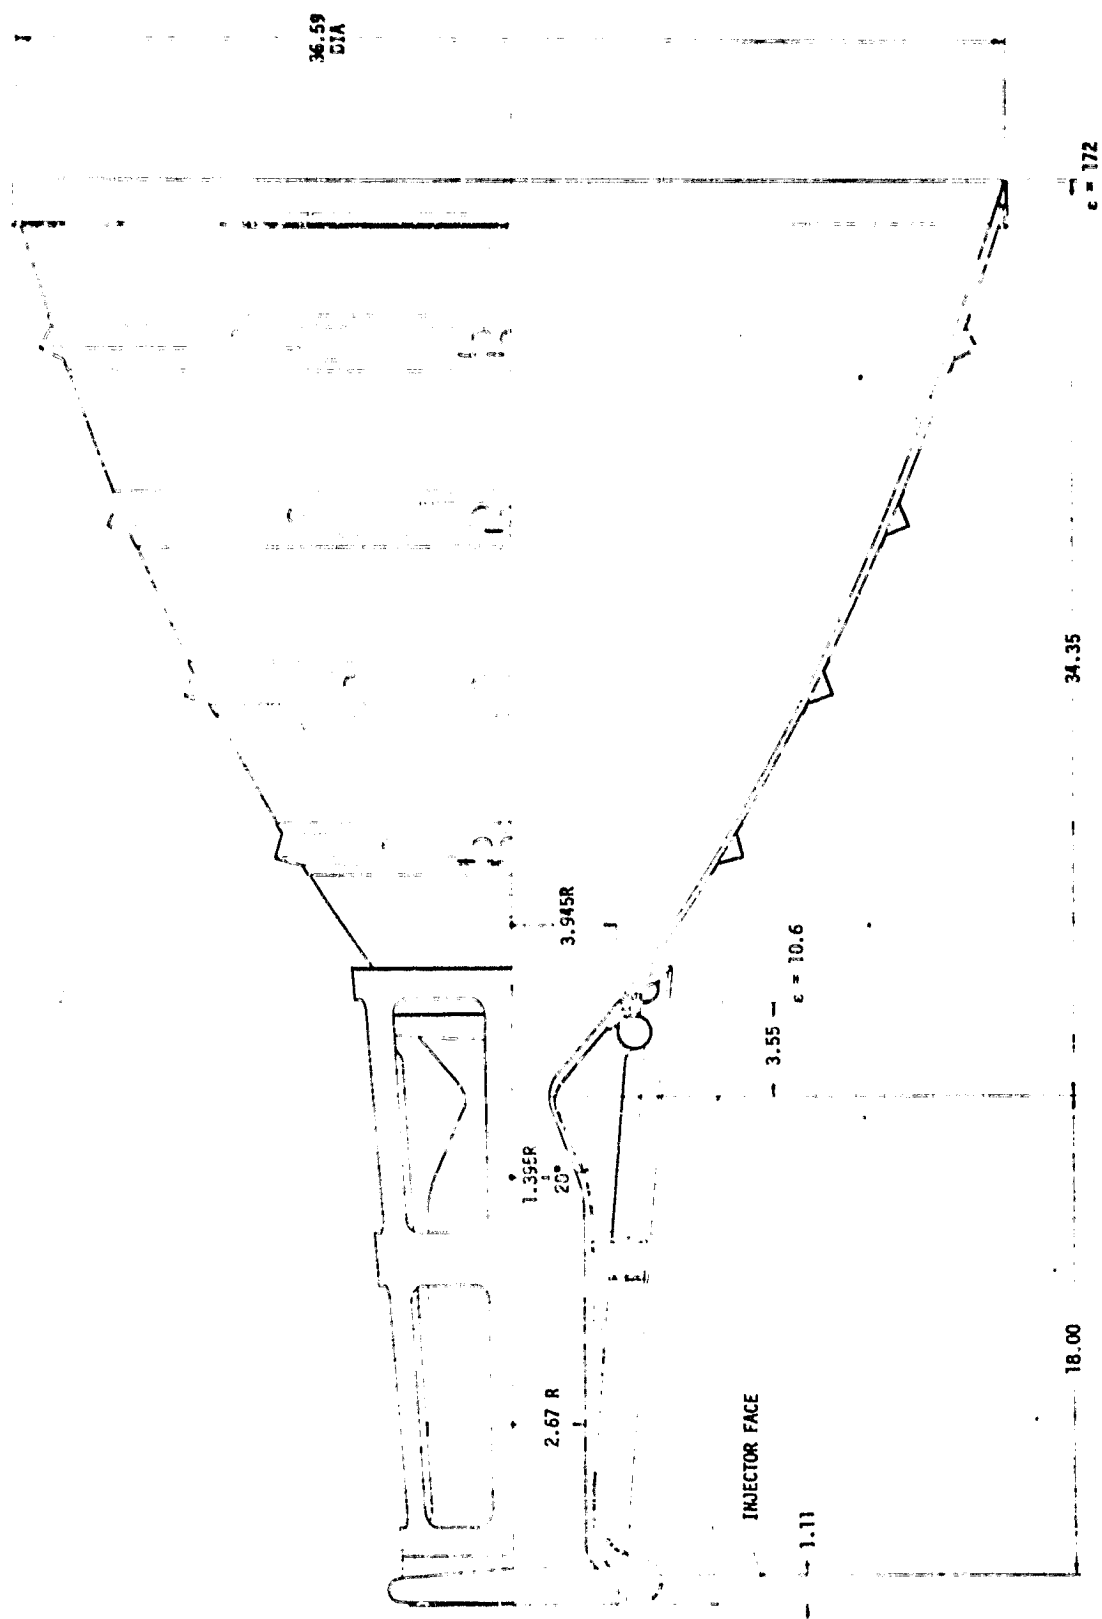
Chamber and Tube Bundle Nozzle Design (ALRC Drawing No. 1191991)
